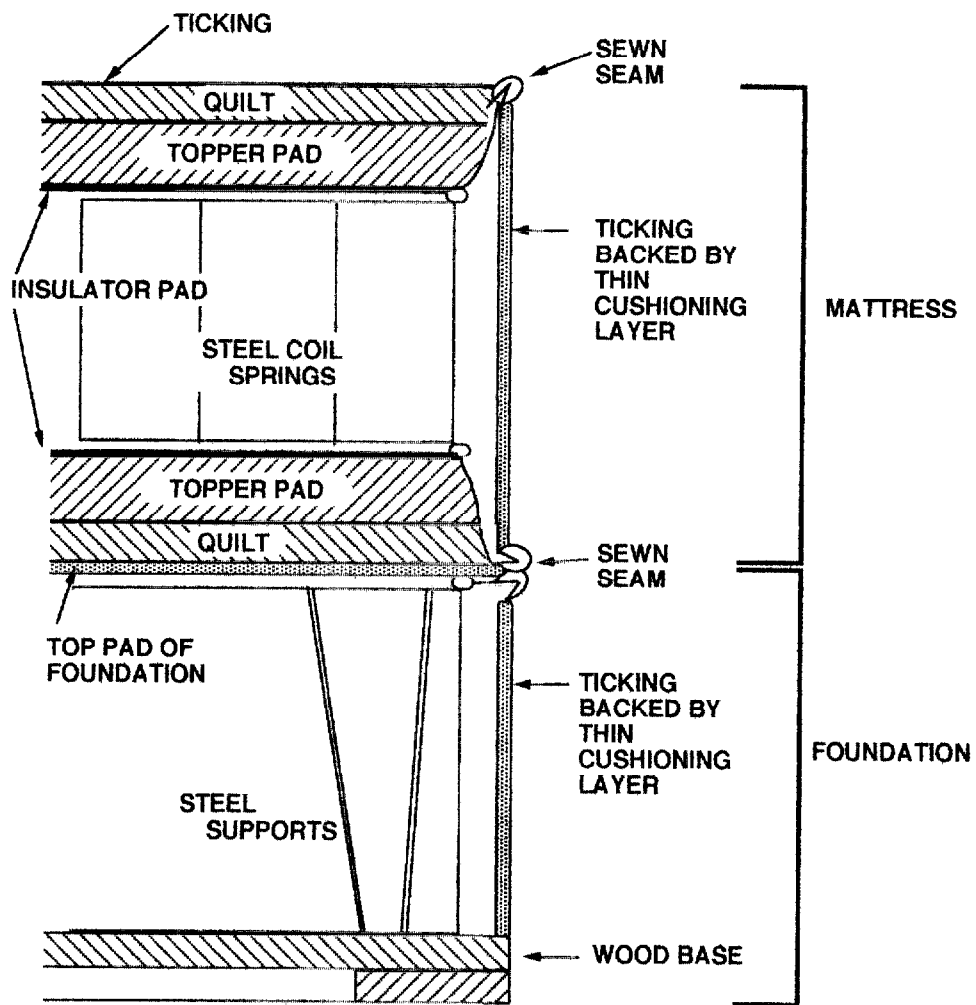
Cross-sectional view of mattress and foundation structure (not to fixed scale).
